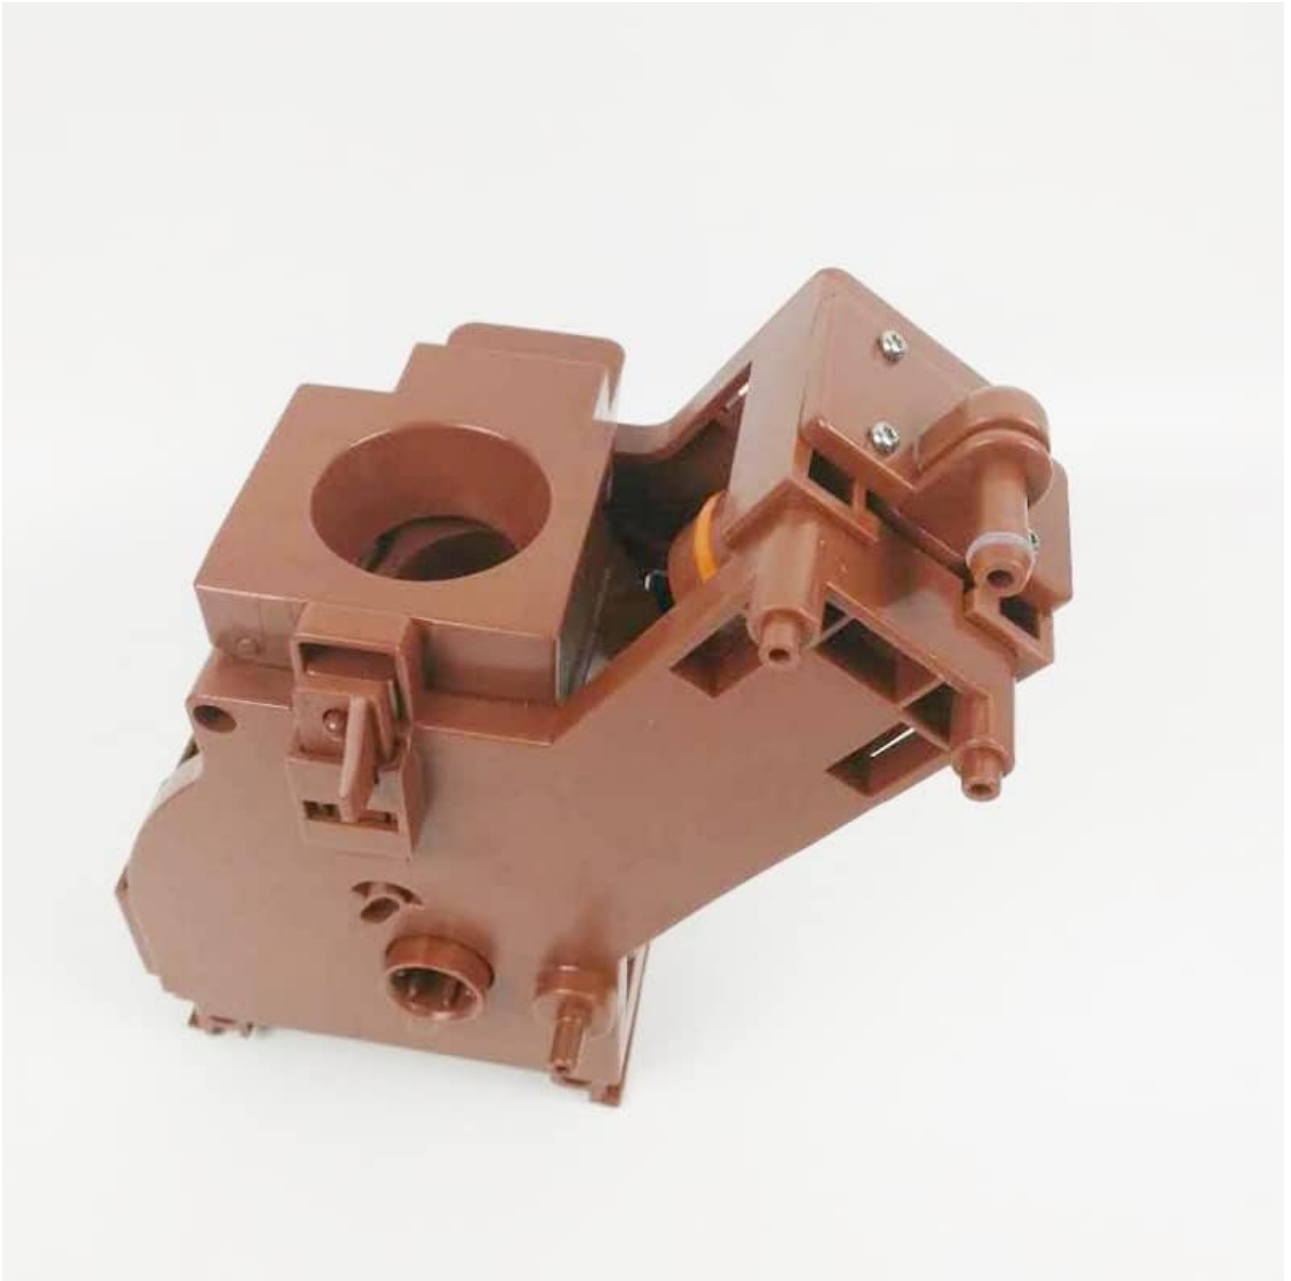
Side-angled view of the MEROL Brewer Unit. This view emphasizes the depth and various protrusions for integration into the coffee machine.
